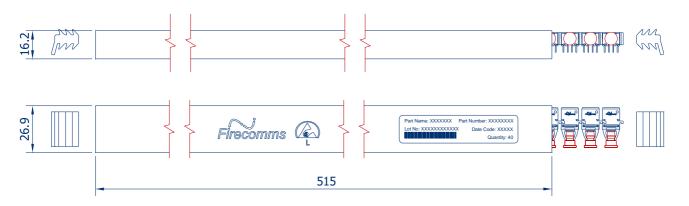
Packing tube for Firecomms RedLink[®] horizontal connectors
